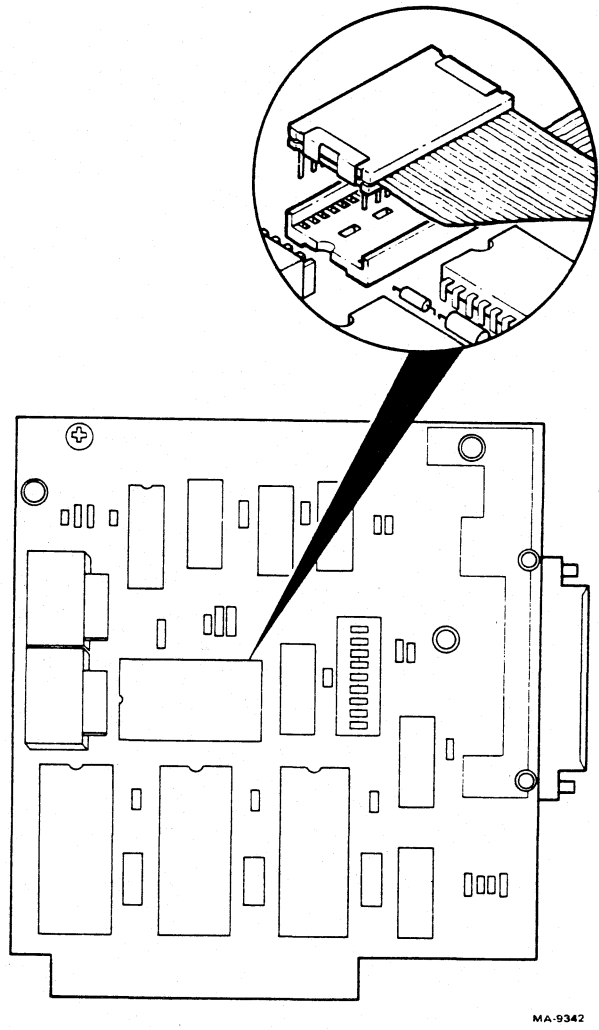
VT125 24-Pin Flat Cable on STP Board
